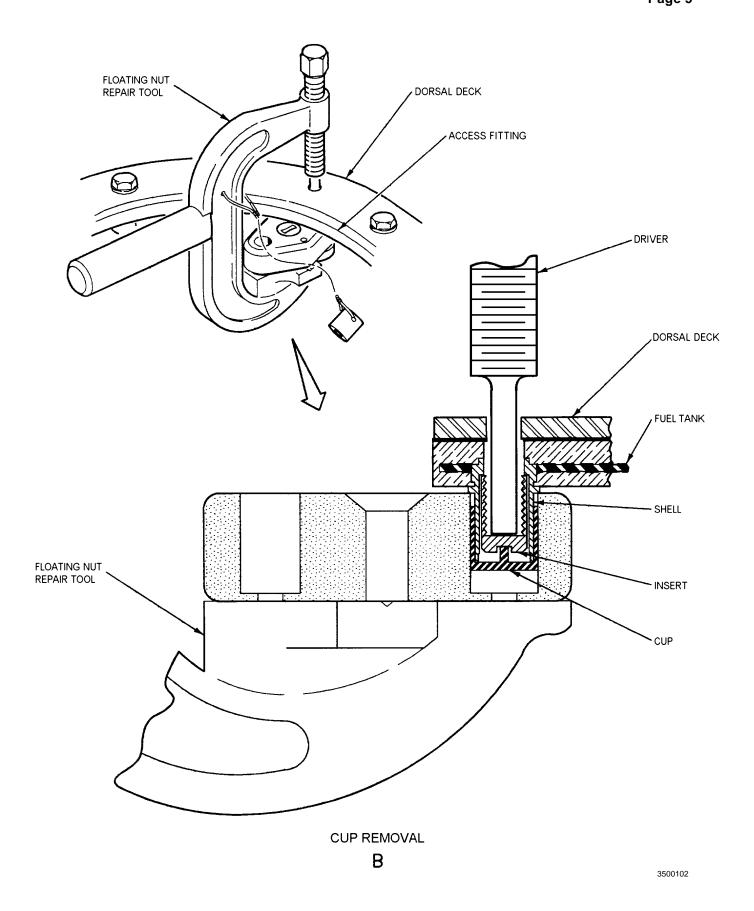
Fuel Tank Access Fitting Floating Nut Repair (Sheet 2)
